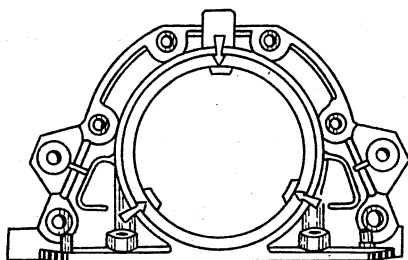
Crankshaft Rear Gland Holder. Arrows Indicate Lugs for Aligning the Holder with Crankshaft Flange
